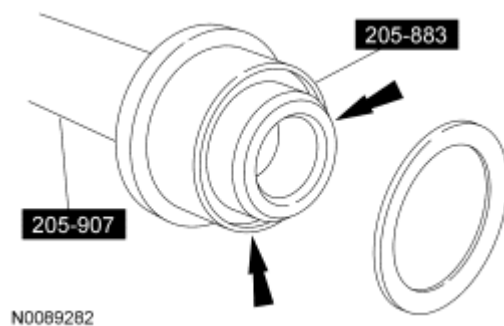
Placing Intermediate Shaft Seal On PTU Link shaft Seal Installer
